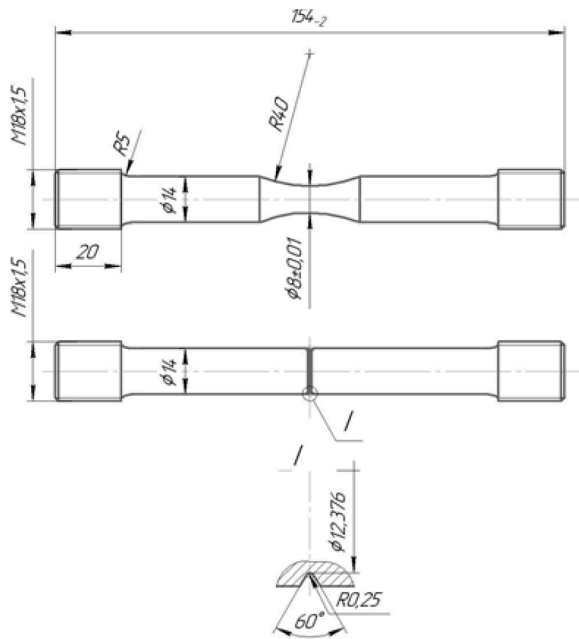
13Cr15Ni4NM03 steel sample drawings.
